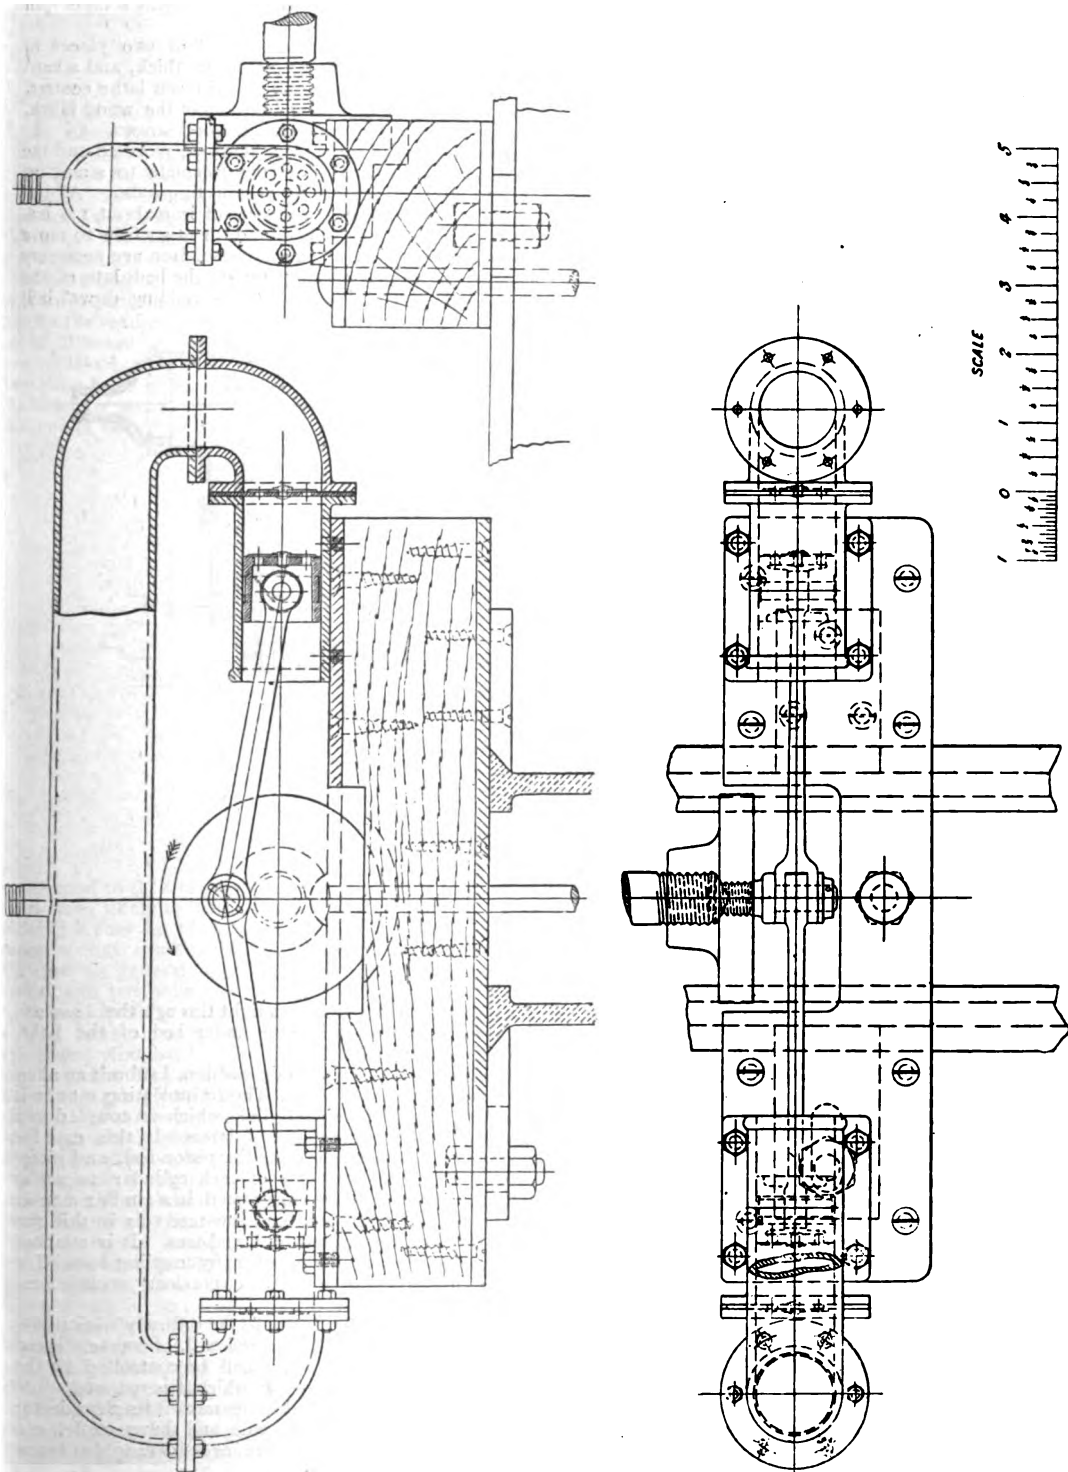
GENERAL ARRANGEMENT OF AIR COMPRESSOR.
